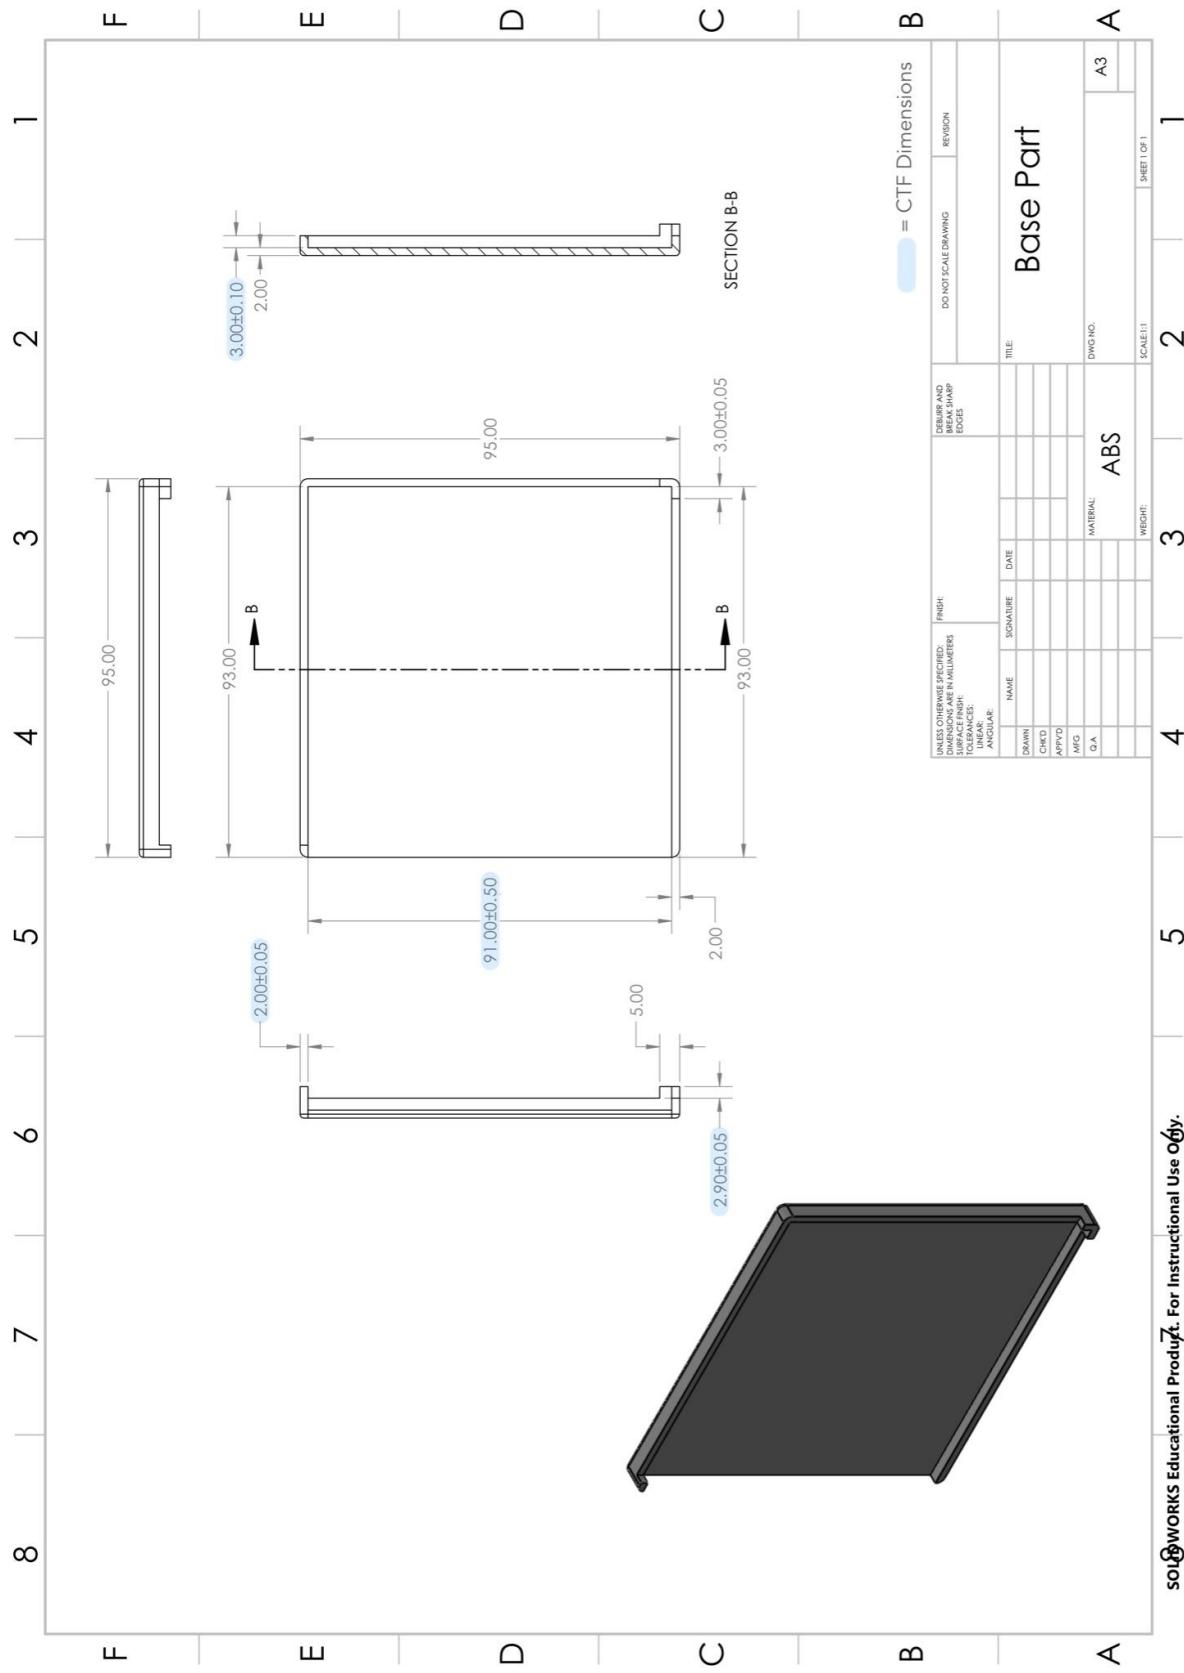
Dimensioned Drawing of Base Part with cross section view
